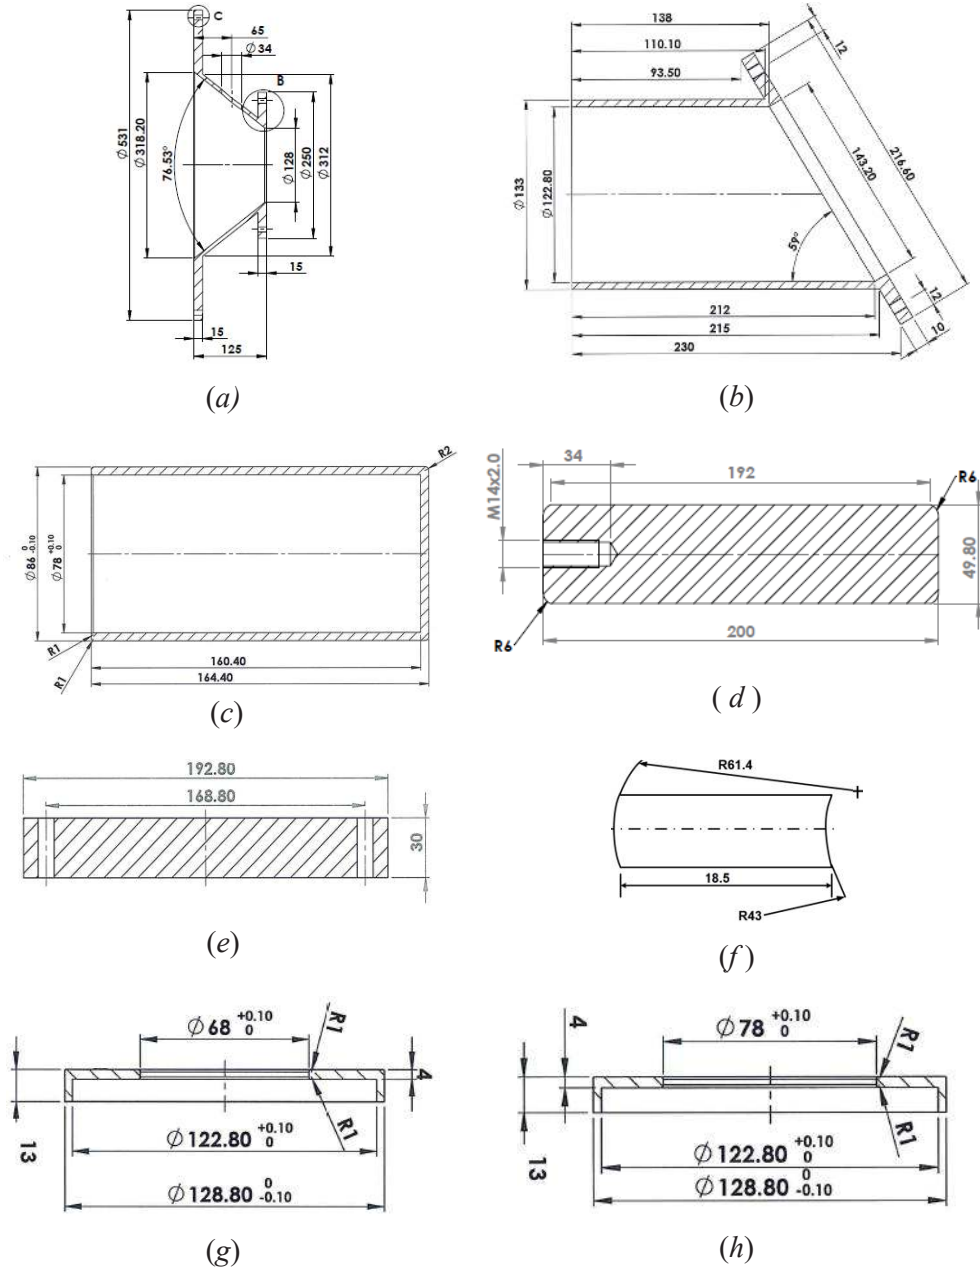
Piece parts drawings of MILO (a) Conical Flange (b) Vlasov antenna (c) Beam dump (d) Cathode (e) Window (f) Stub (g) Choke vane (h) SWS vane .
